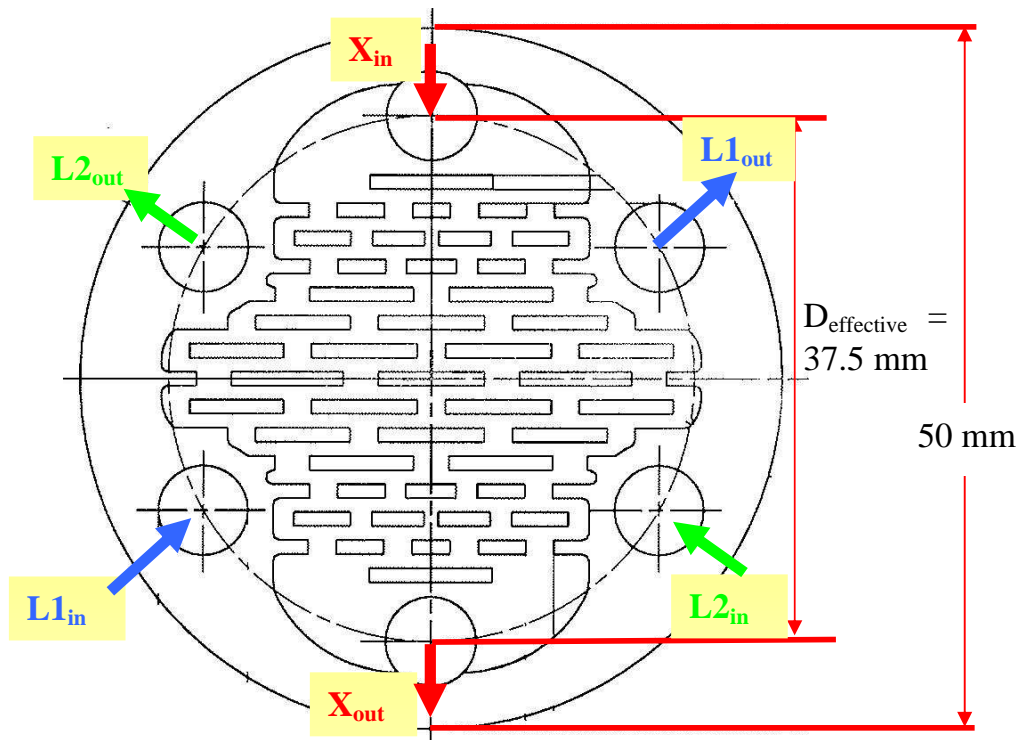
Drawing of one Bread Board Heat eXchanger plate
